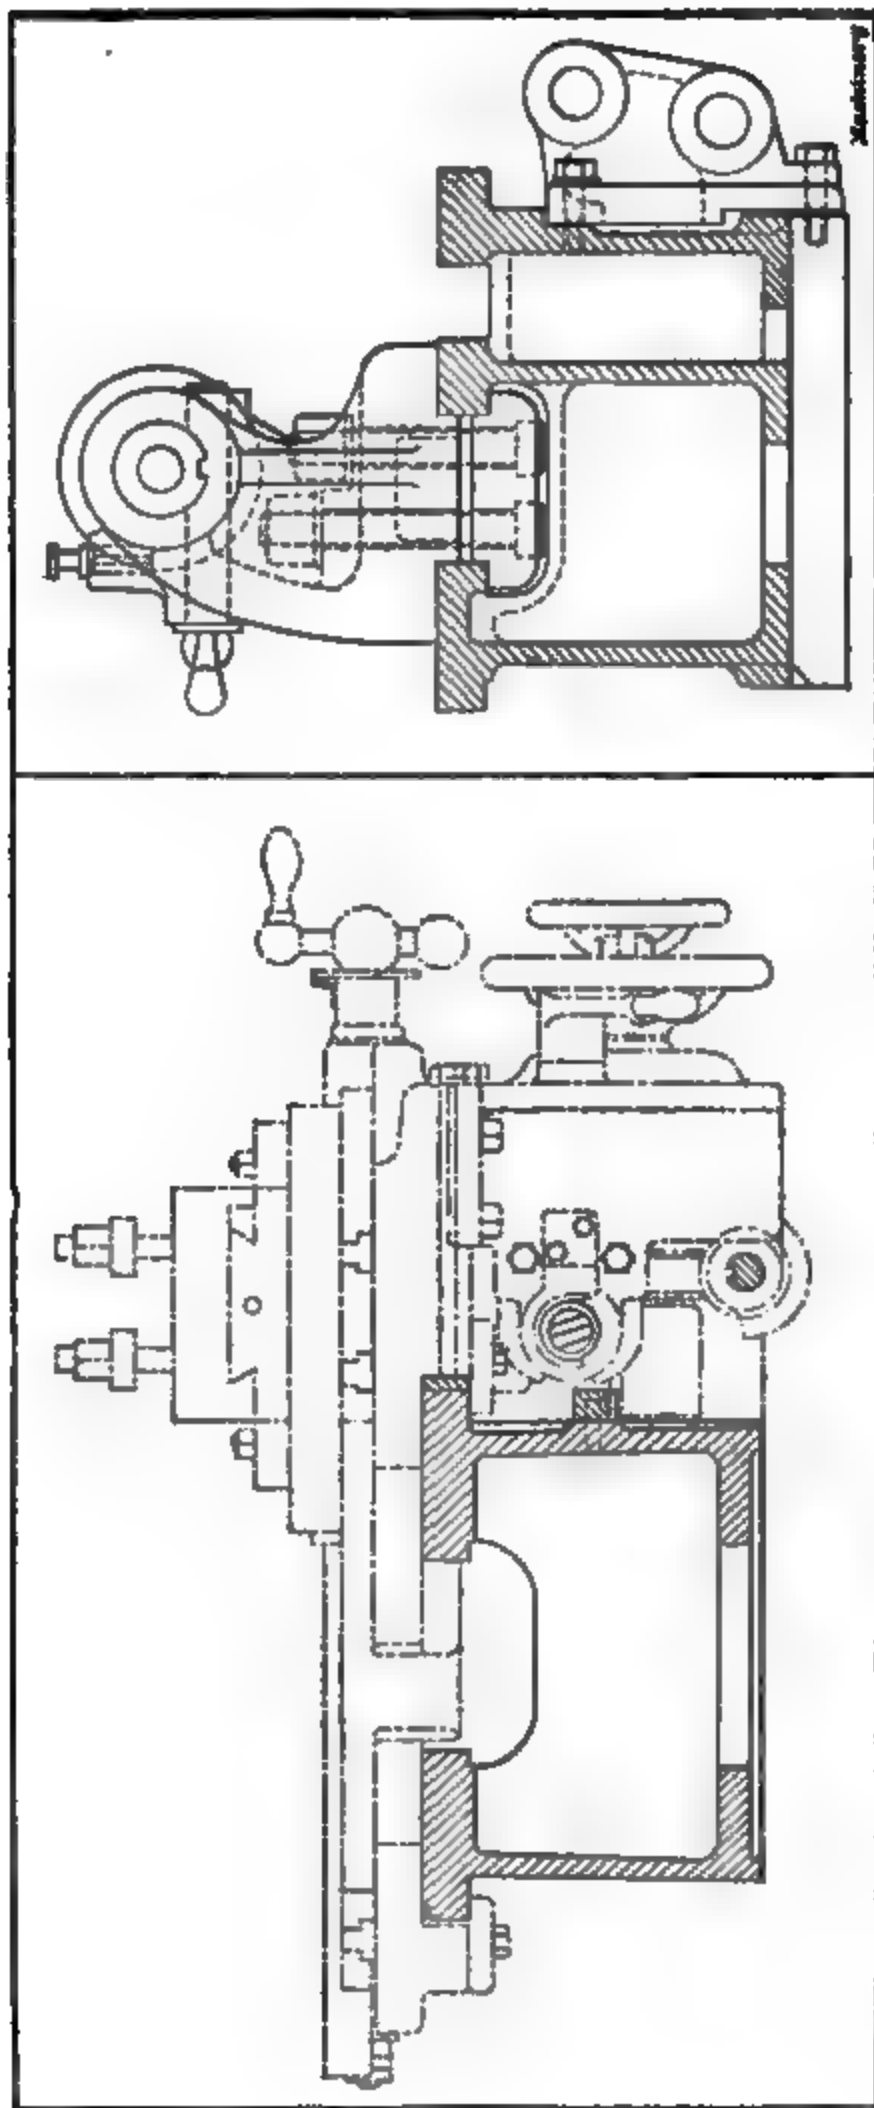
Example of Narrow Guide on Front Shear of Lathe, designed by John Stirk & Sons, Ltd., Halifax, England
